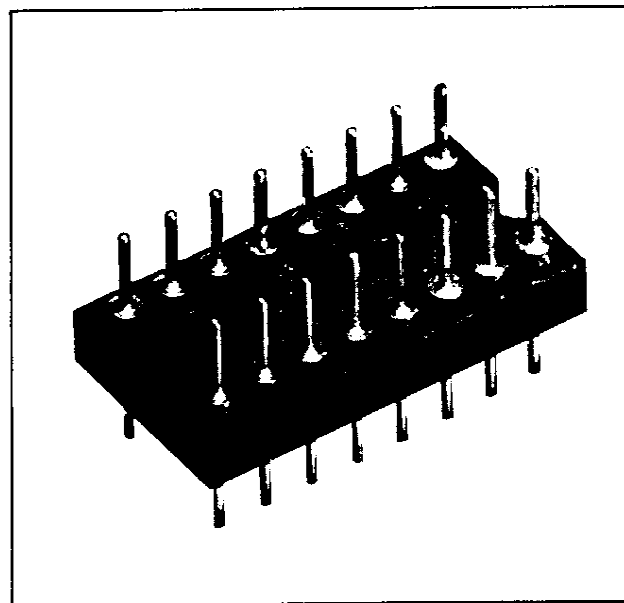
Dual-in-line Adaptor Plug for Mounting Discrete Components.
